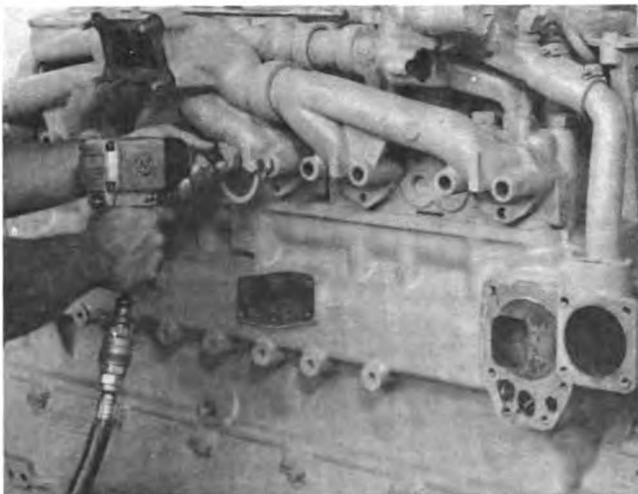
Remove The Capscrews From The Exhaust Manifold.
